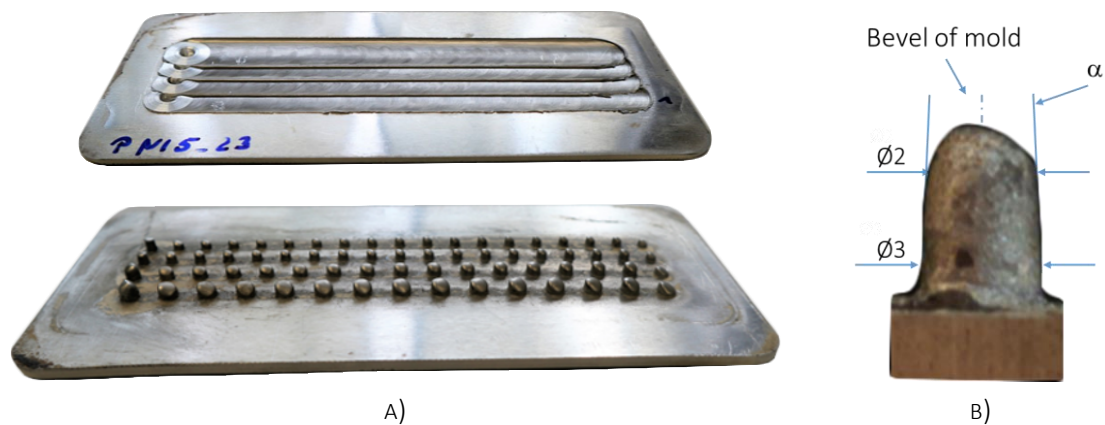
A) FRONT AND BACK SIDE OF A FSFED SHEET AND B) PIN GEOMETRY DETAILS
